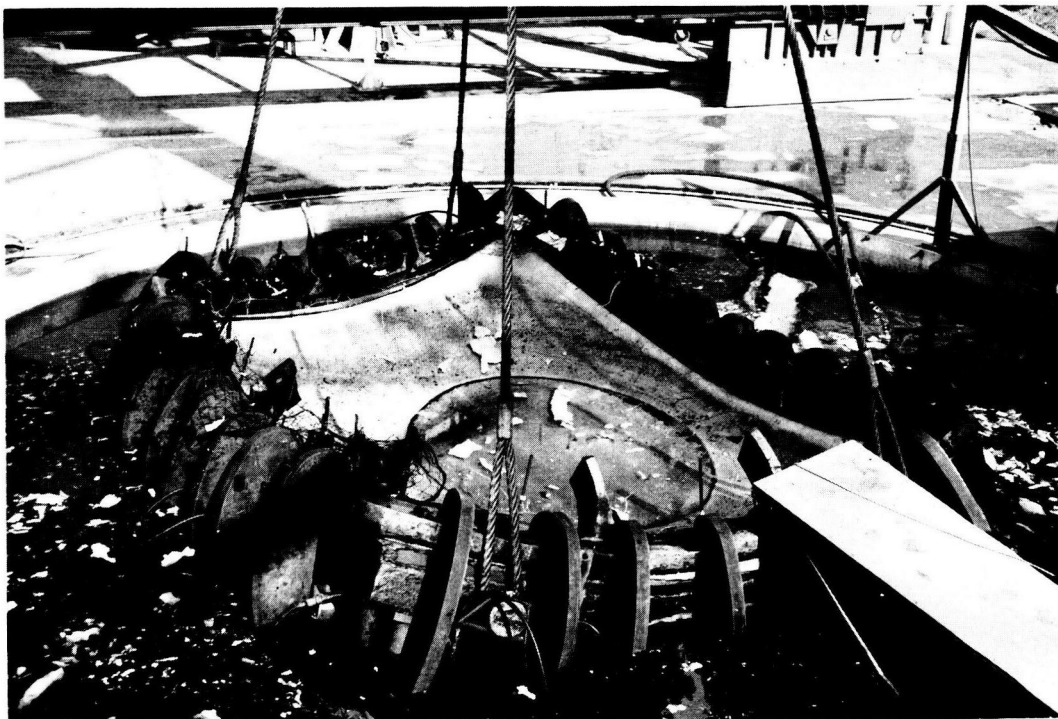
Base Gore After Forming - An Early Jury-Rigged Shot Using Only Hydraulic Jack Type Clamping.
